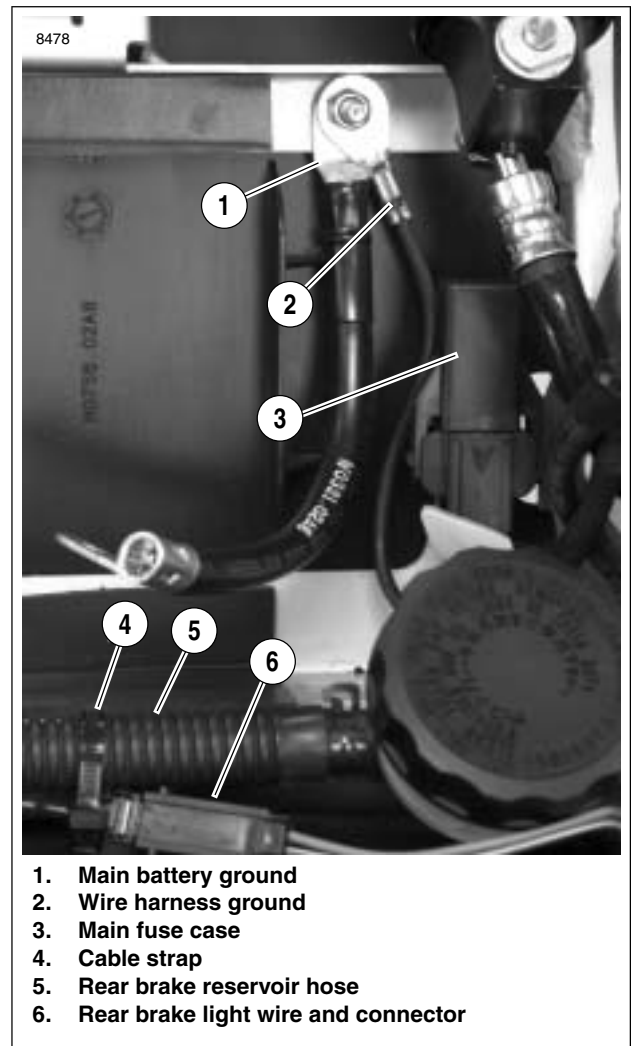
Subframe Tail Assembly and Body Work Assembly
